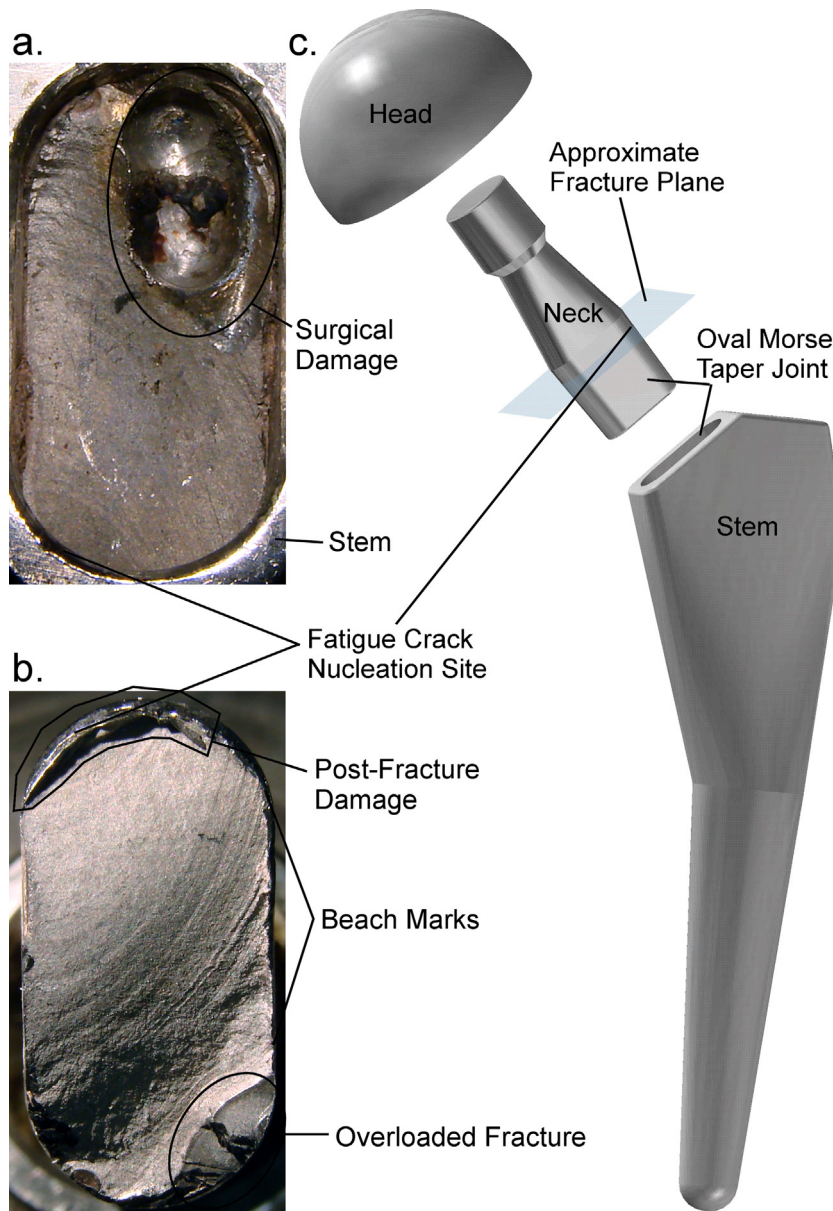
(a) Optical photograph of the fracture surface of the neck that remained in the stem. The surgical damage was created by a tool used to remove the implant from the body. (b) Optical photograph of the fracture surface of the neck that remained attached to the head. Post-fracture damage occurred when the fractured neck slid across the inside of the stem's taper surface. (c) Exploded model of the modular hip implant, showing where neck fracture occurred. Both the neck and stem were made of Ti–6Al–4V.
